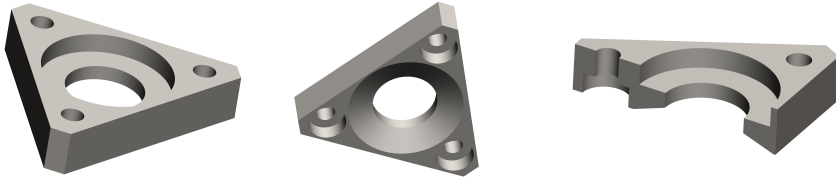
Left, middle: Sketch of the triangular shaped *nozzle retaining fixture* (3) for the nozzle disc, right: 3D scheme half section of the *nozzle retaining fixture*.
